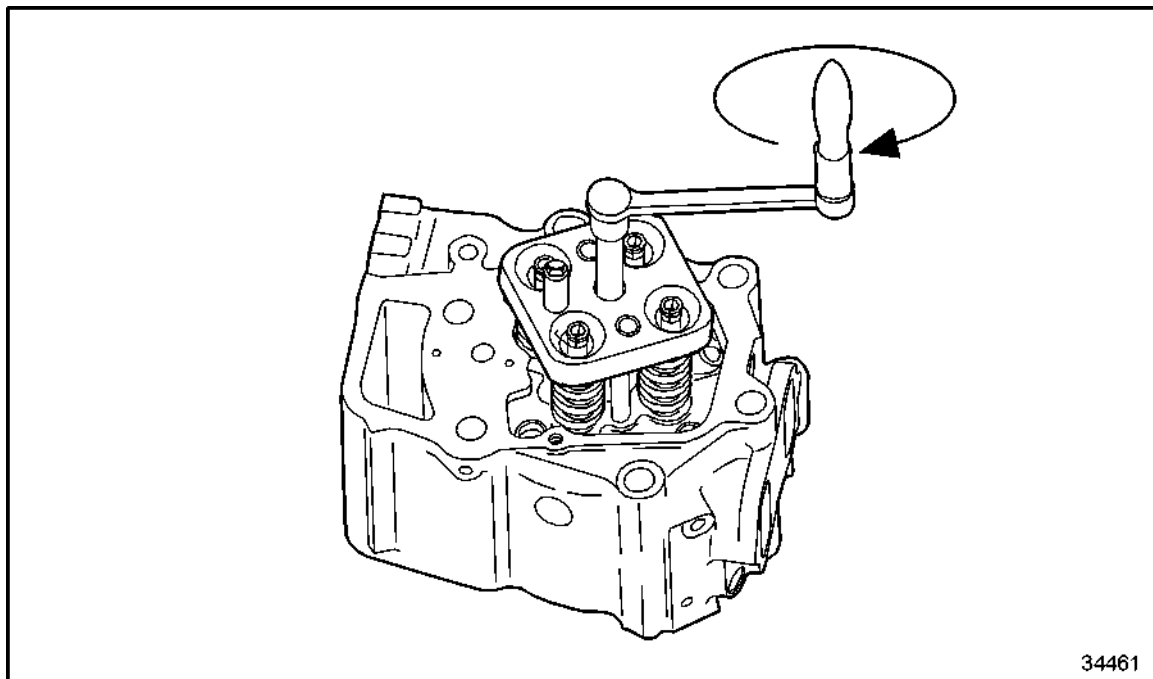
Rotating Hand Spindle of Valve Spring Pretensioner
